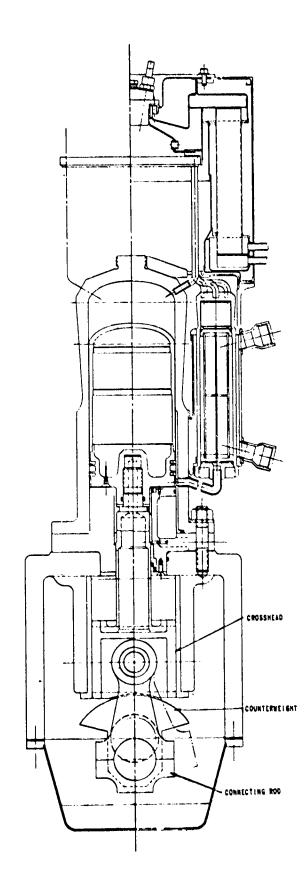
Cross Section of Single Crank In-Line Engine.
